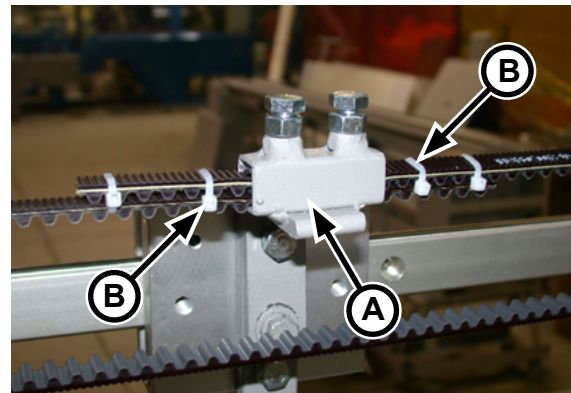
Brackets hold the sections of the upper spreader belt in position.
